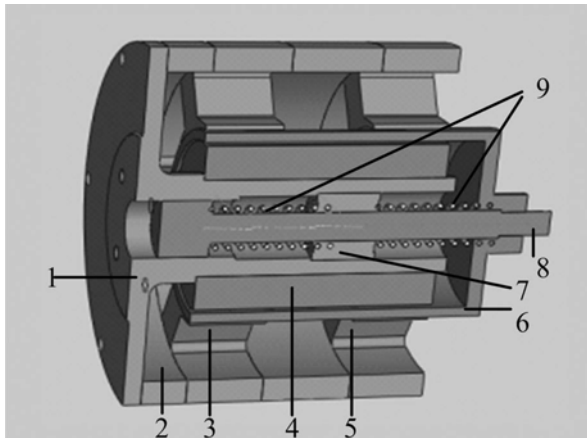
Reciprocating magnetic actuator for a compressor [23]. Parts are: (1) compression chamber, (2) outer shell, (3) left outer steel stator with copper winding (not shown), (4) inner steel stator, (5) right outer stator, (6) permanent magnet armature, (7) linear bearing, (8) piston in compression chamber, (9) spring with spring constant K .
